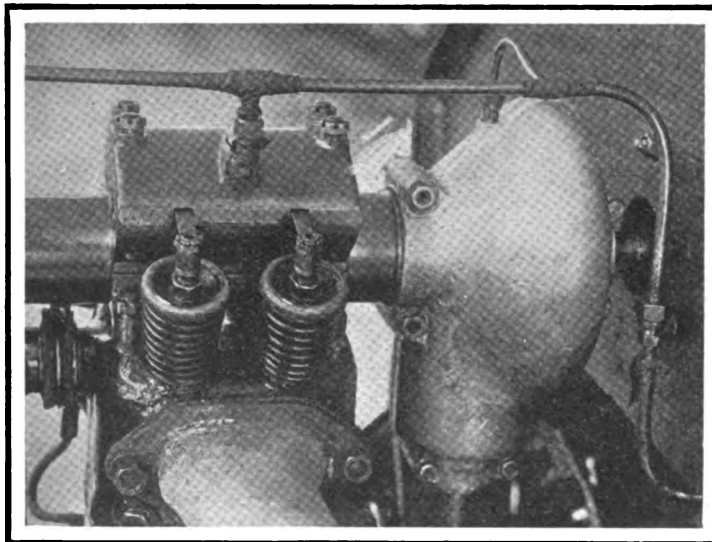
Mercedes Motor—Each forged steel cylinder was fitted with two intake and two exhaust valves operated from an overhead camshaft with sixteen cams
